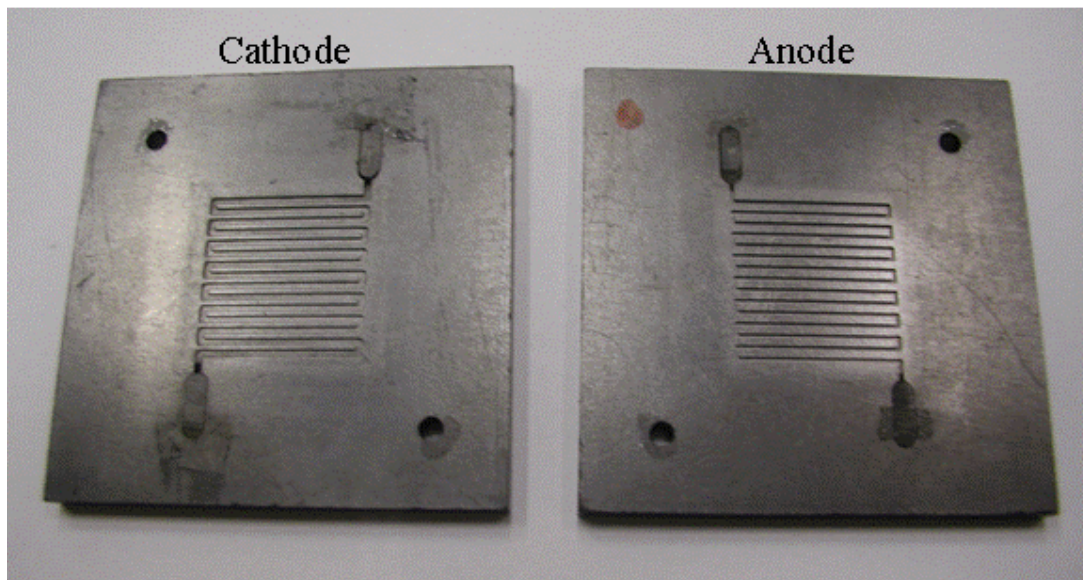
Bipolar plates used in the PEM fuel cell assembly
